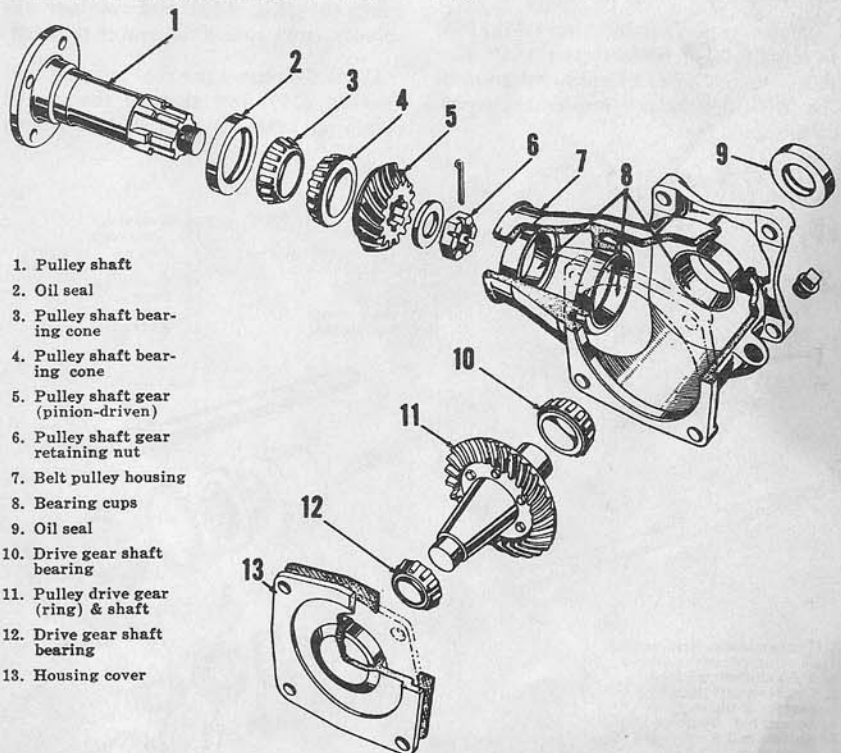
Belt pulley unit is mounted on the rear face of the rear axle center housing and receives its drive from the pto shaft.
